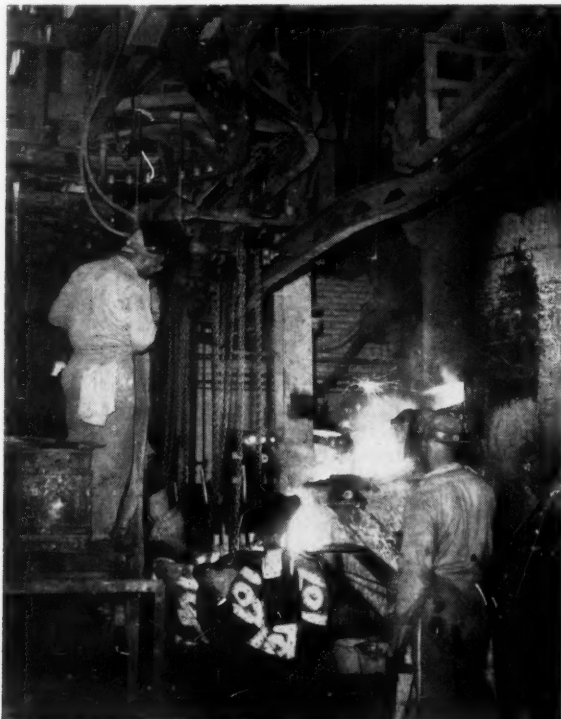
Ladle handling is mechanized, too, at National Malleable. Pouring ladles (being filled, above) are traveling to the pouring floors on a Trambeam monorail.
